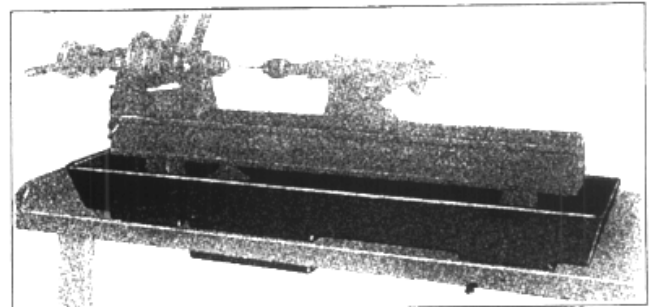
Oil Pan on bench, for countershaft drive. Weight 86 lbs.
